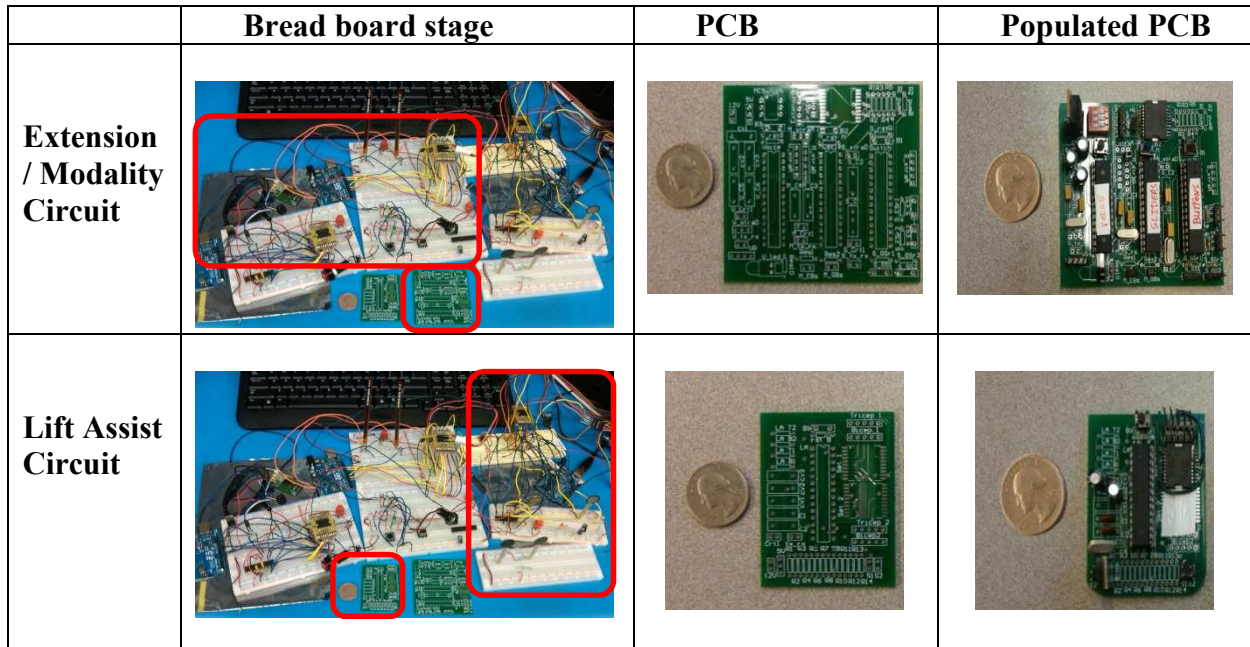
This Figure shows stages of the Printed Circuit Board (PCB) for the modalities from design to building and populating the PCB.
